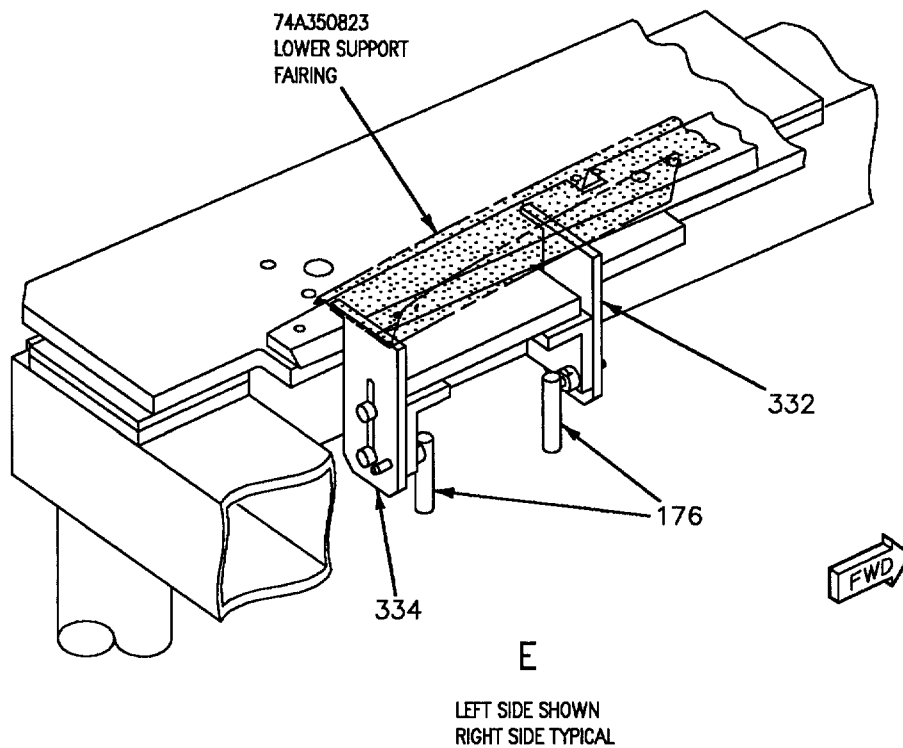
Replacement - Aft Rocket Motor Support (Sheet 4)
